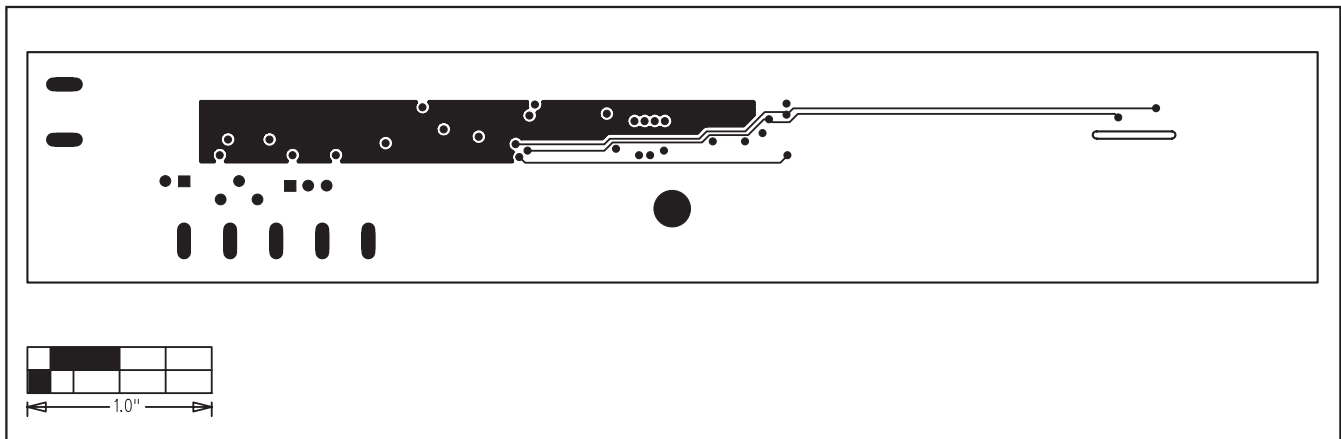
MAX8722 EV Kit PC Board Layout—Layer 3
